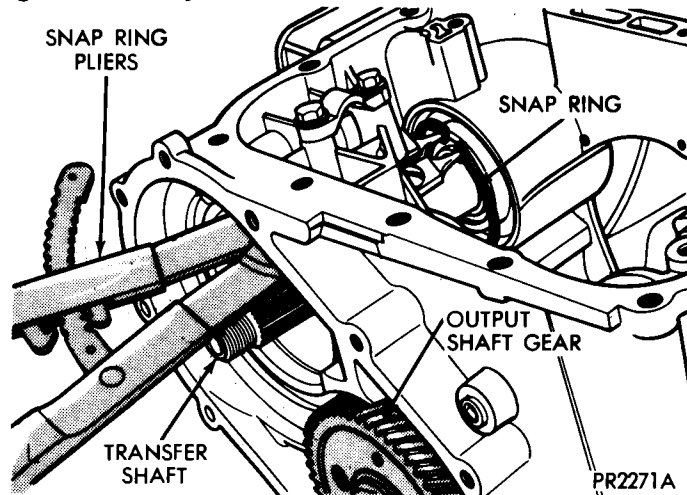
Remove or Install Transfer Shaft Bearing Retainer Snap Ring
